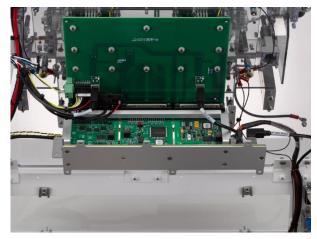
TestScale mounted directly beneath the DUT inside a fixture
